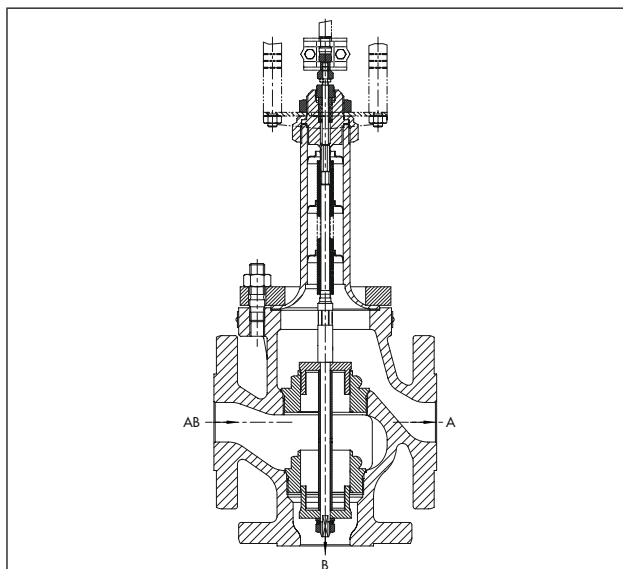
Type 3535 Three-way Valve for Heat Transfer Oil · Plug arrangement for diverting service
